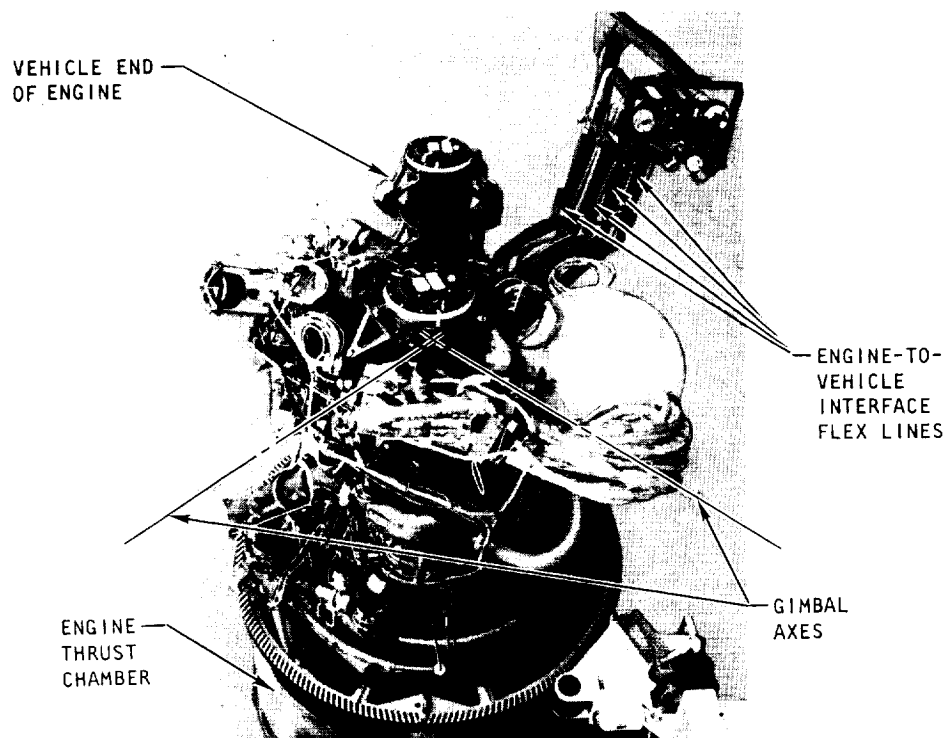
Off-center hose configuration crossing gimbal plane used in engine-to-vehicle lines of J-2 engine.
